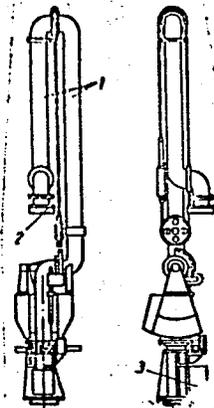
1 - swivel-connected pipes; 2 - attachment device; 3 - emergency disconnect unit.
